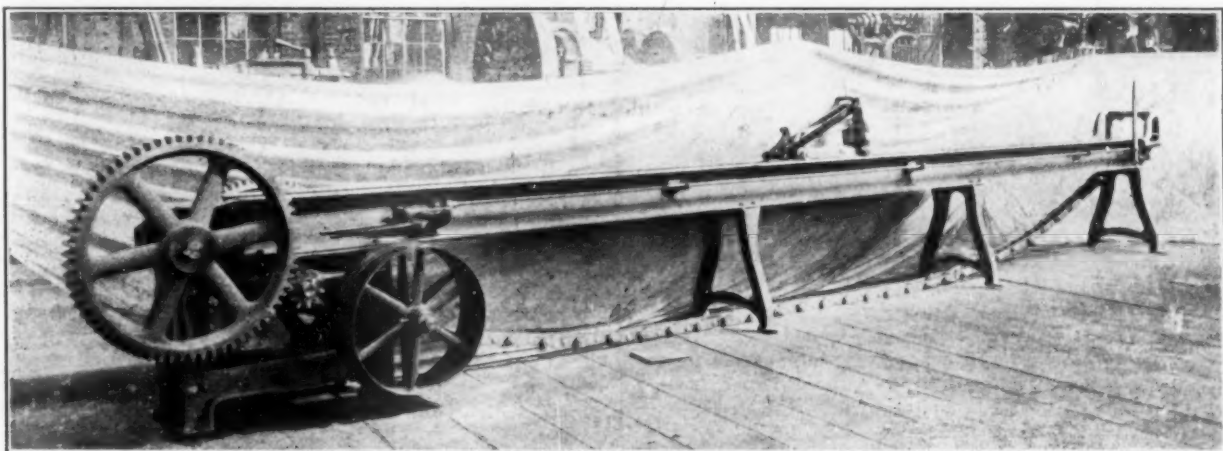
A SEAMLESS TUBE CHAIN DRIVEN DRAW BENCH AT THE PLANT OF RANDOLPH CLOWES COMPANY, WATERBURY, CONN.
